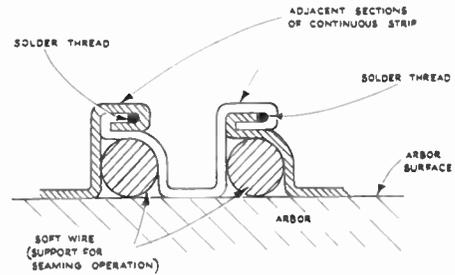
Principle of construction of soldered interlocking tube shown on winding machine arbor.
